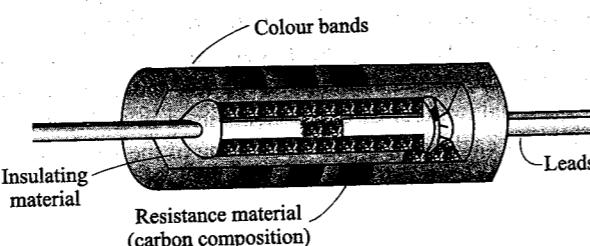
The basic construction of a fixed, moulded-carbon composition resistor
